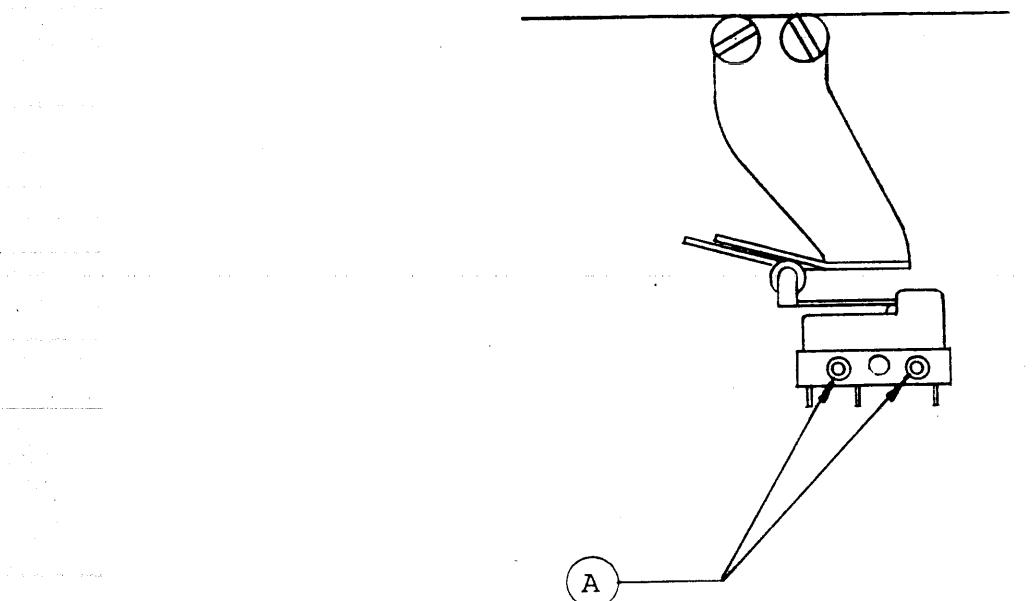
HEAD CARRIAGE RETRACT SWITCH
